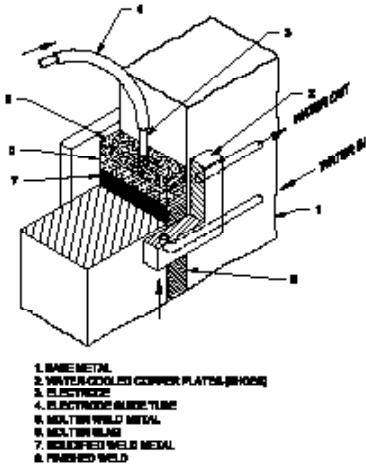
Schematic of Electro-Slag Welding
